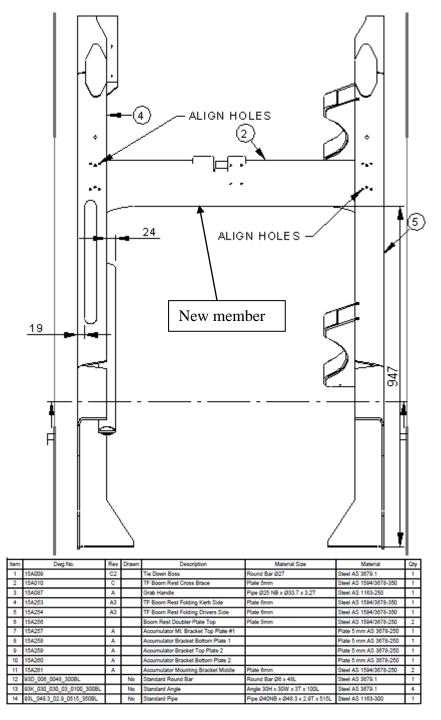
Representation of new member location – The member is to be welded 6mm S.P. fillet weld
